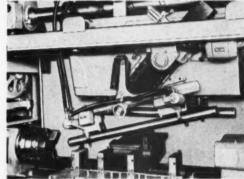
Loader Trolley at machine station. Ejector Arm has picked up finished shaft. Injector Arm is tipping and lowering a rough shaft. Headstock spindle is stopped, chuck jaws open and tailstock centre
